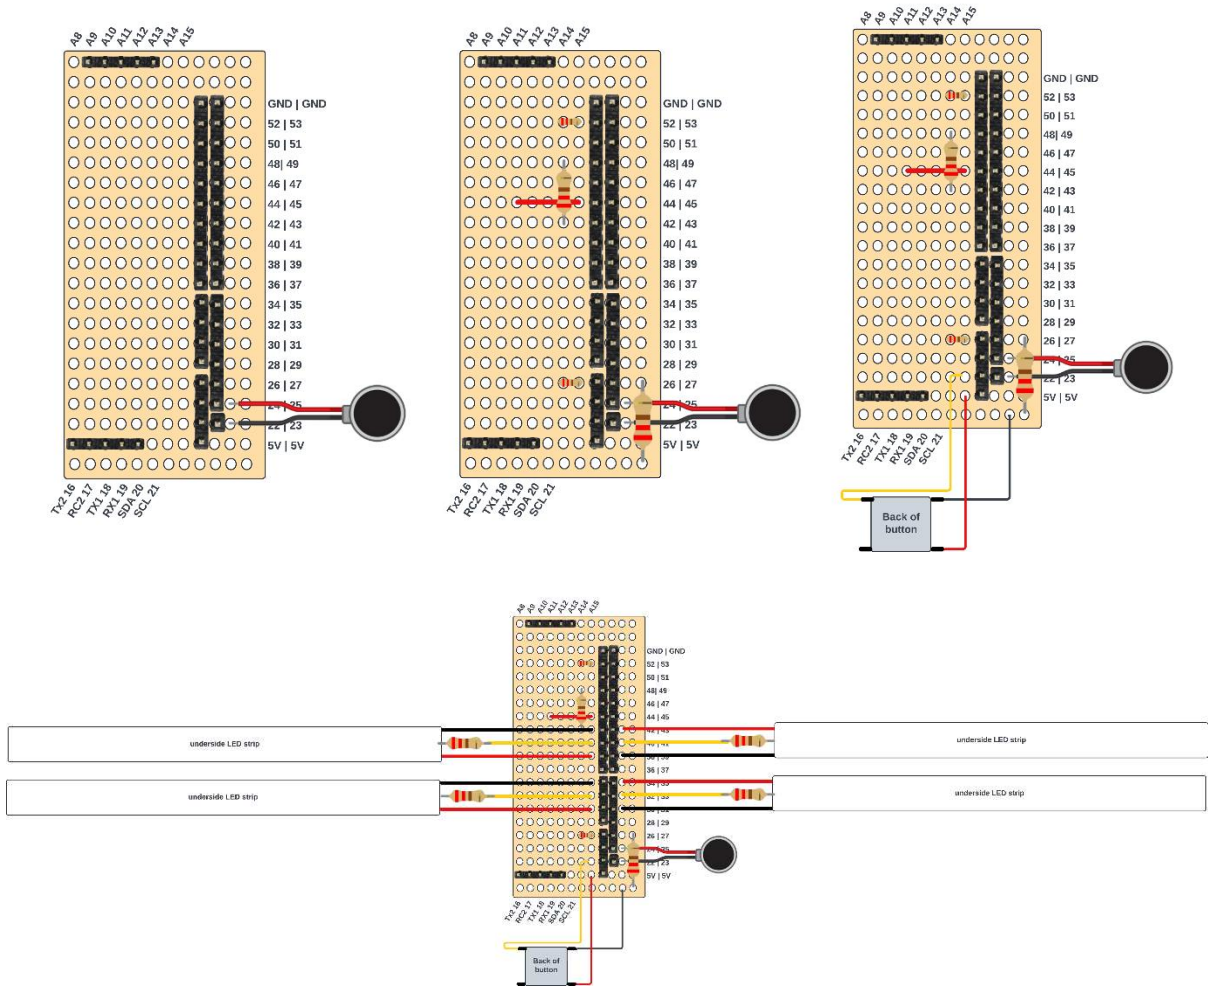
Tailor the PCB to the right size 12x21 holes. The figures illustrate what will be the back side of the PCB which will later be put on the Arduino mega like a shield. Apply the pin headers, vibration motor, 220 ohm resistors, the button and the LED strips like in the figures.
